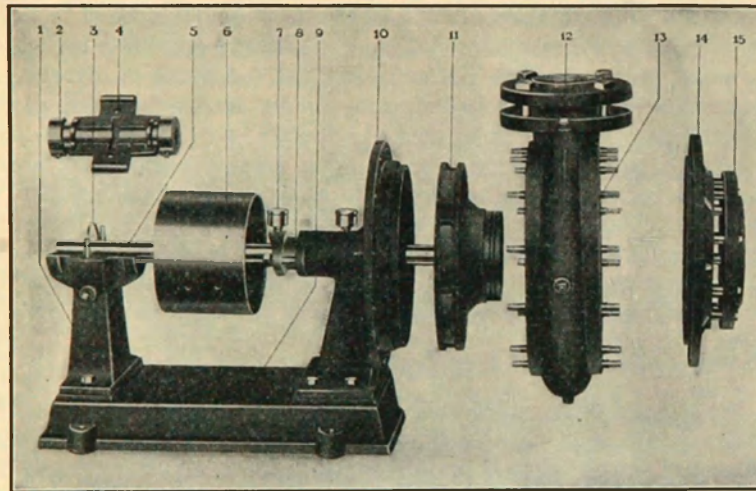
Horizontal centrifugal pump with enclosed impeller: 1, pedestal bearing; 2, thrust collar; 3, oil ring; 4, pedestal-bearing cap; 5, shaft; 6, pulley; 7, grease cup; 8, stuffing-box gland; 9, base plate; 10, inboard head; 11, impeller; 12, discharge flange; 13, volute; 14, outboard head; 15, suction flange.
